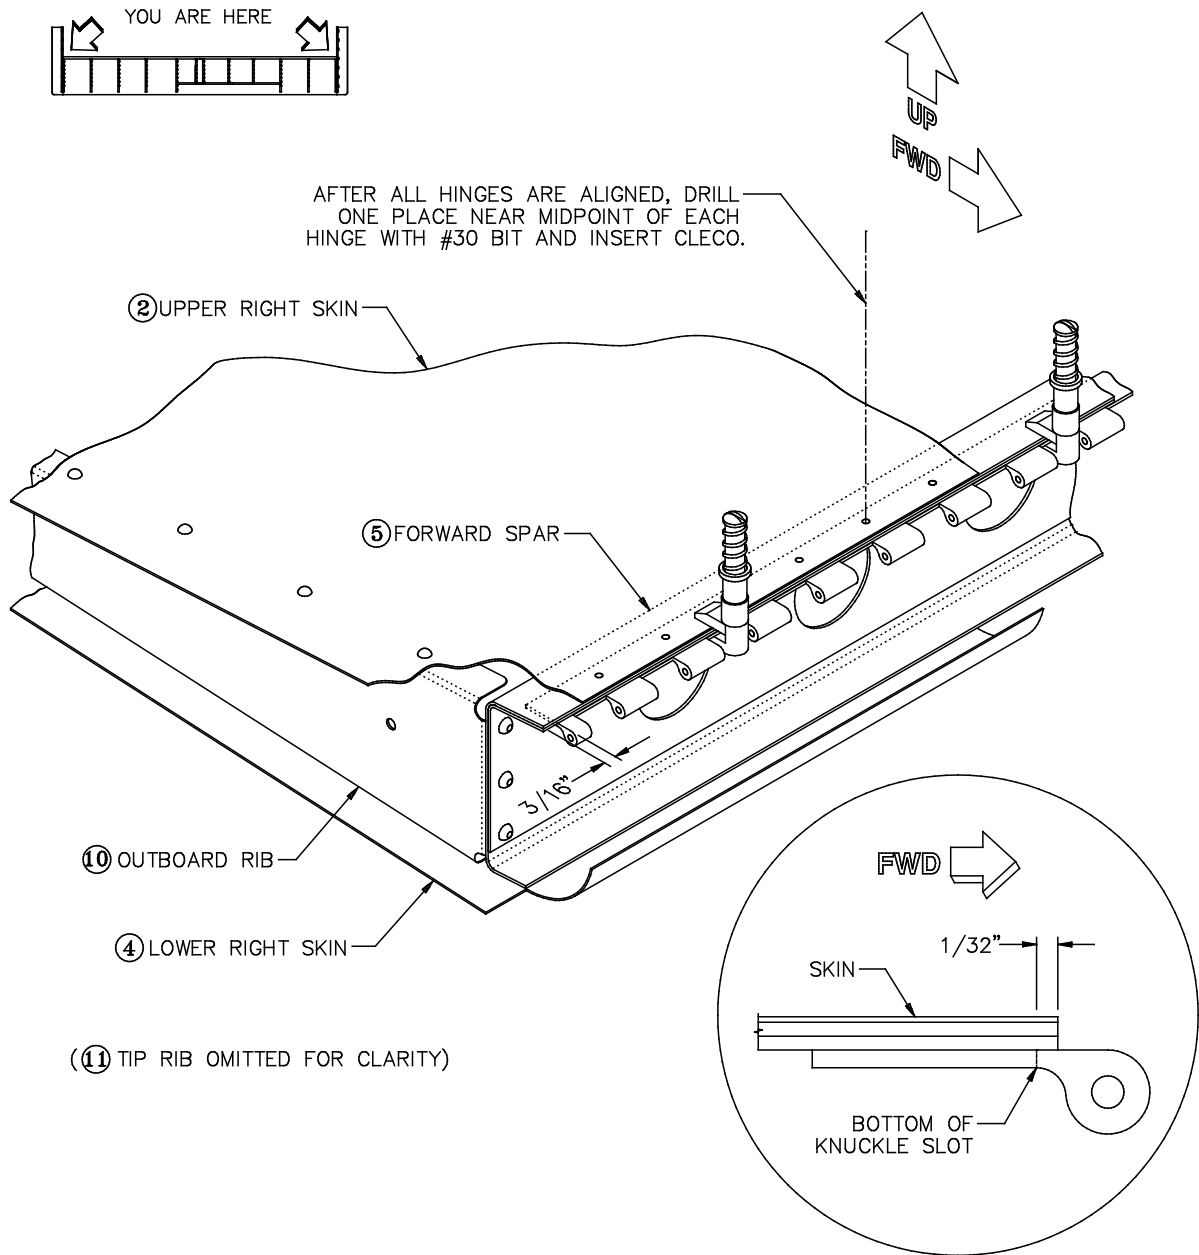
Aligning and Drilling the Elevator-Side Hinge Halves
